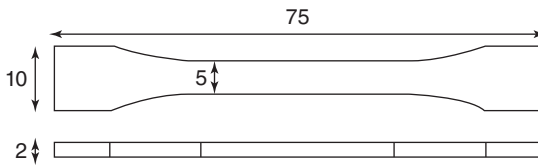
The tensile test specimen used for the build projection (dimensions in mm).
